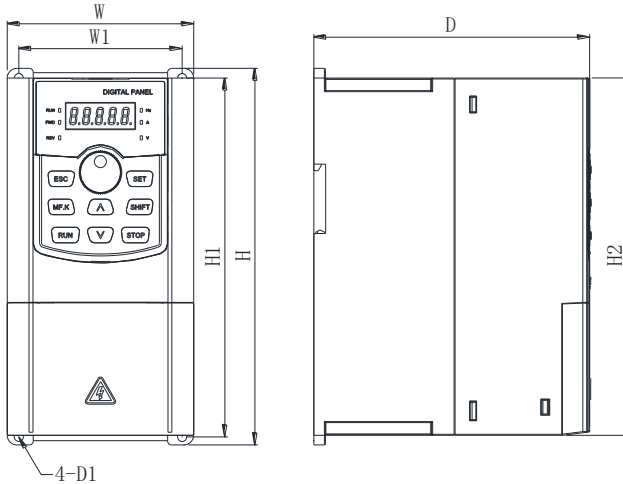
Plastic Housing Mounting Hole Dimension Drawing
